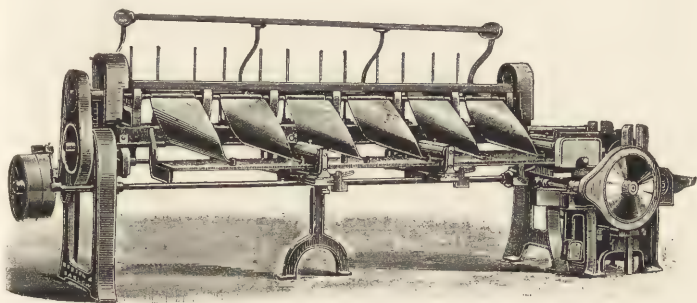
COMBINED LAP AND DRAW MACHINE, OR 'RIBBON LAPPER.'
